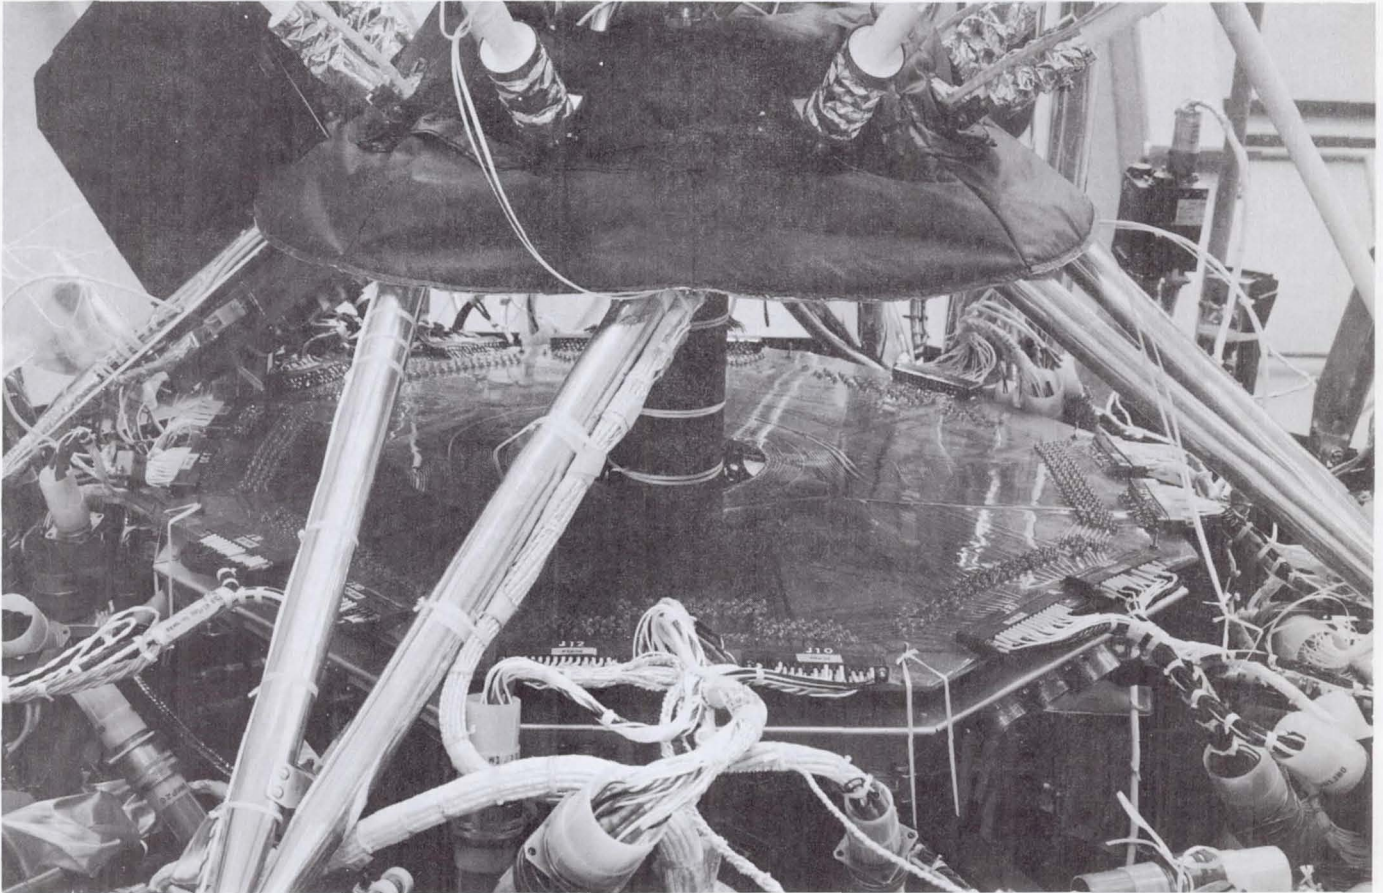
Mariner C PTM upper ring harness printed circuit board
